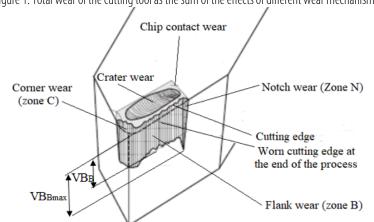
Types of wear on the surfaces of cutting tools with a cutting edge
